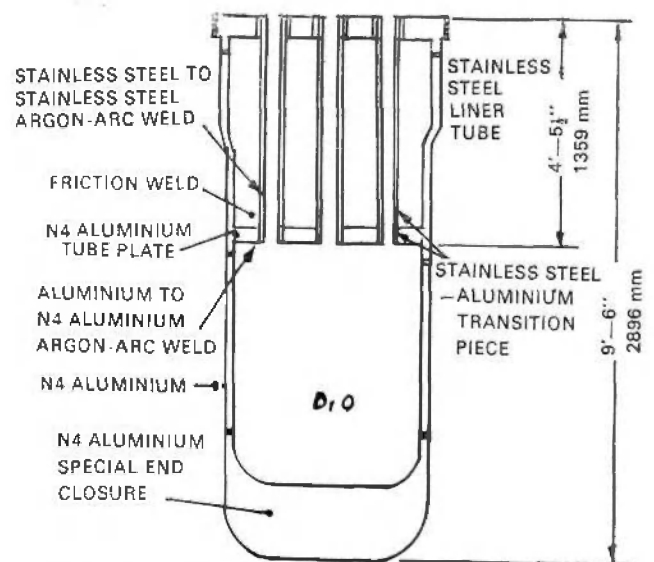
A containment vessel used in nuclear industry utilising stainless steel to aluminium transition pieces
